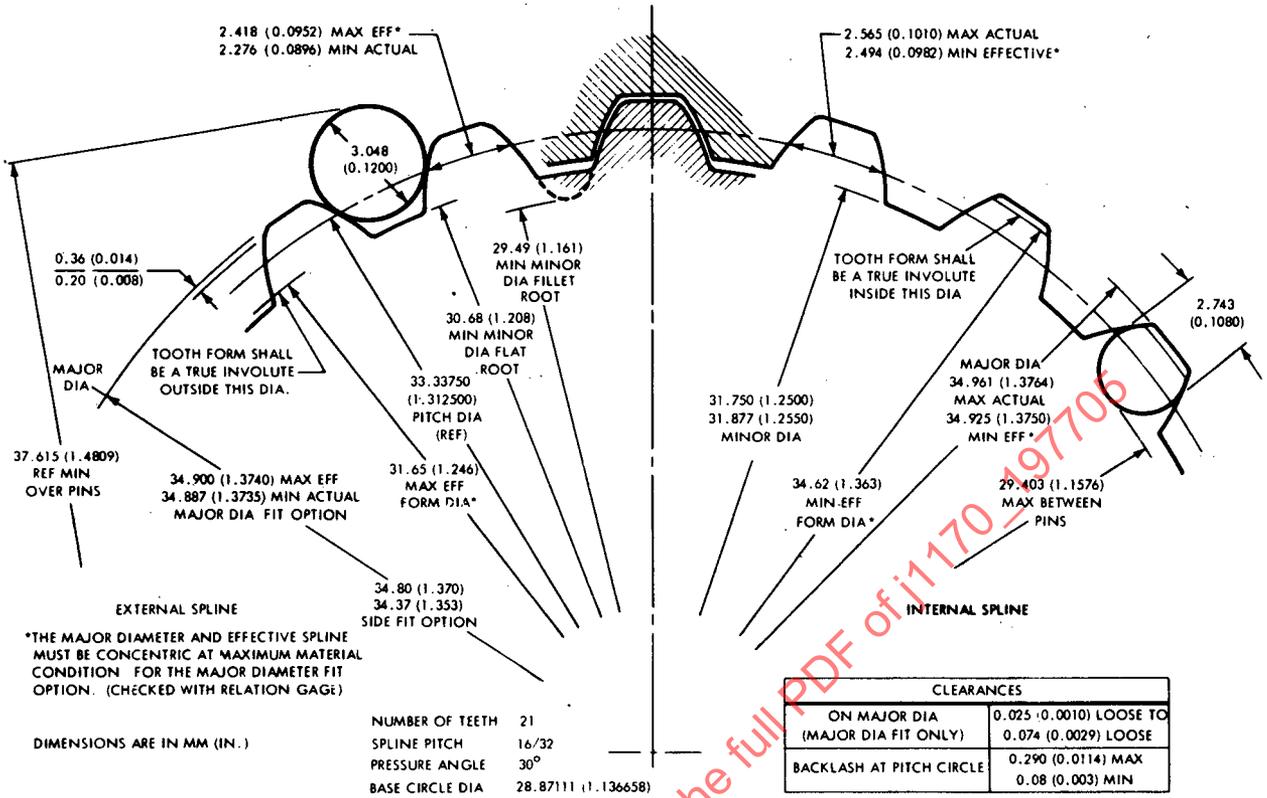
1000 R/MIN POWER TAKE-OFF (35 mm (1 3/8 in) involute spline dimensions)
